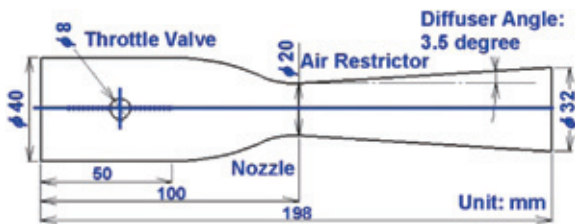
Dimension of Air Restrictor (Three-Dimensional Solid CAD Model) [Shape 04, Diffuser Angle: 3.5 [degree]]
